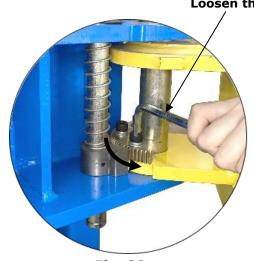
Use the 8[#] Socket Head Wrench to loosen the Socket Bolt.
